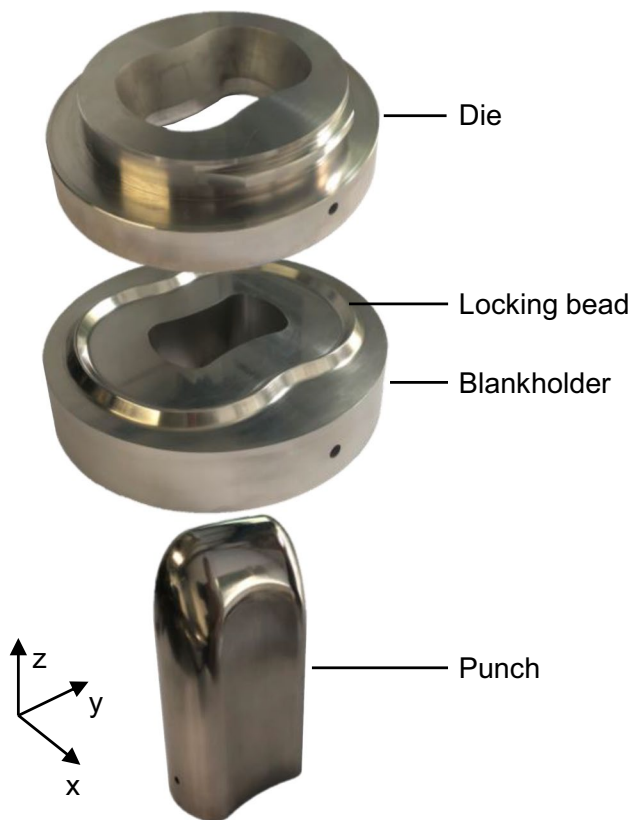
The MUC-Test tool consisting of die, blankholder and punch (according [41])
